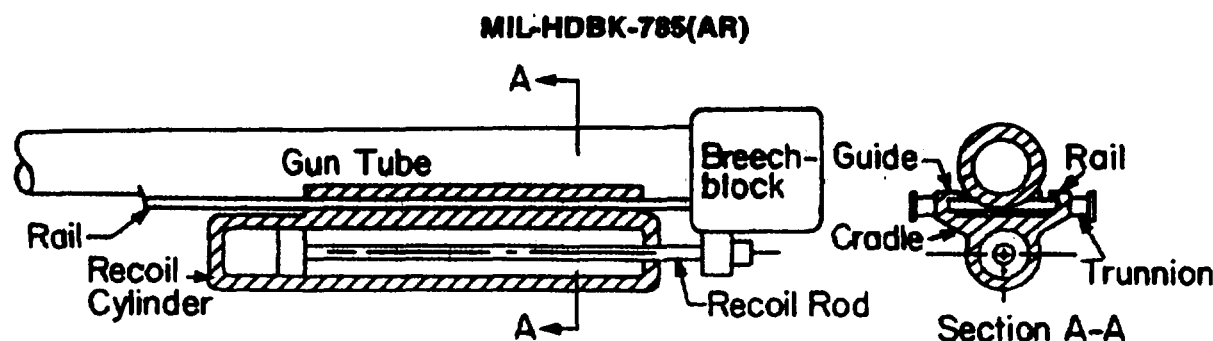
U-Type Cradle With Integral Recoil Mechanism
